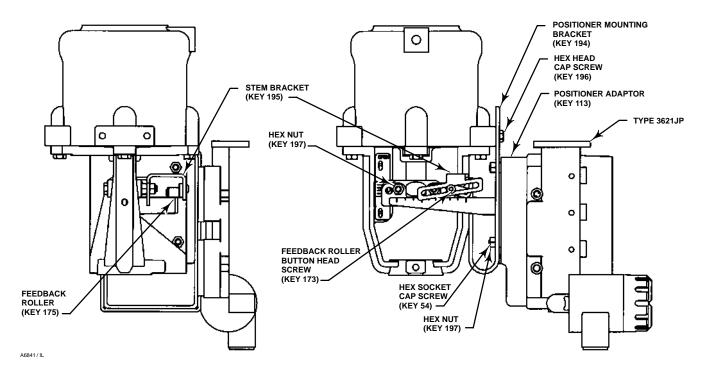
Typical Mounting Details for Type 3611JP and 3621JP Positioners on Type 585C Actuator
